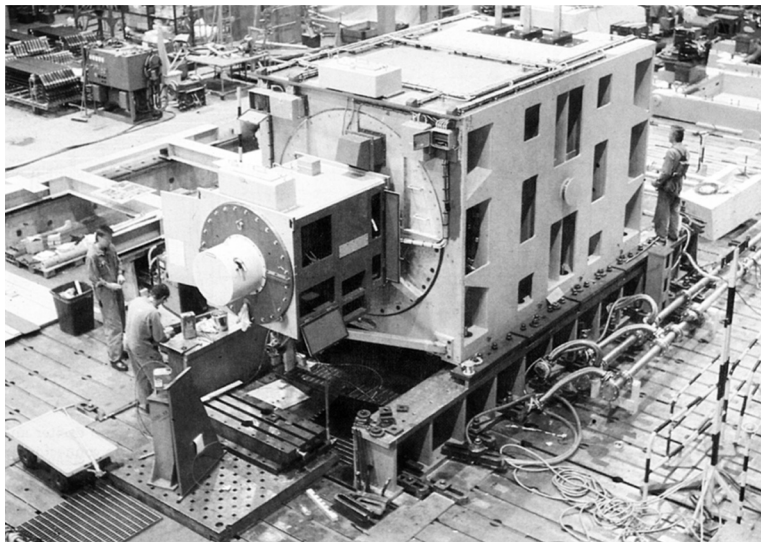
Generator assembly. (Source: Alstom Power.)
